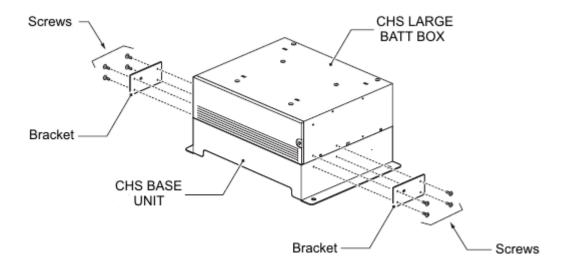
Installing the CHS LARGE BATT BOX using the CHS2U JOINT BRACKET KIT
